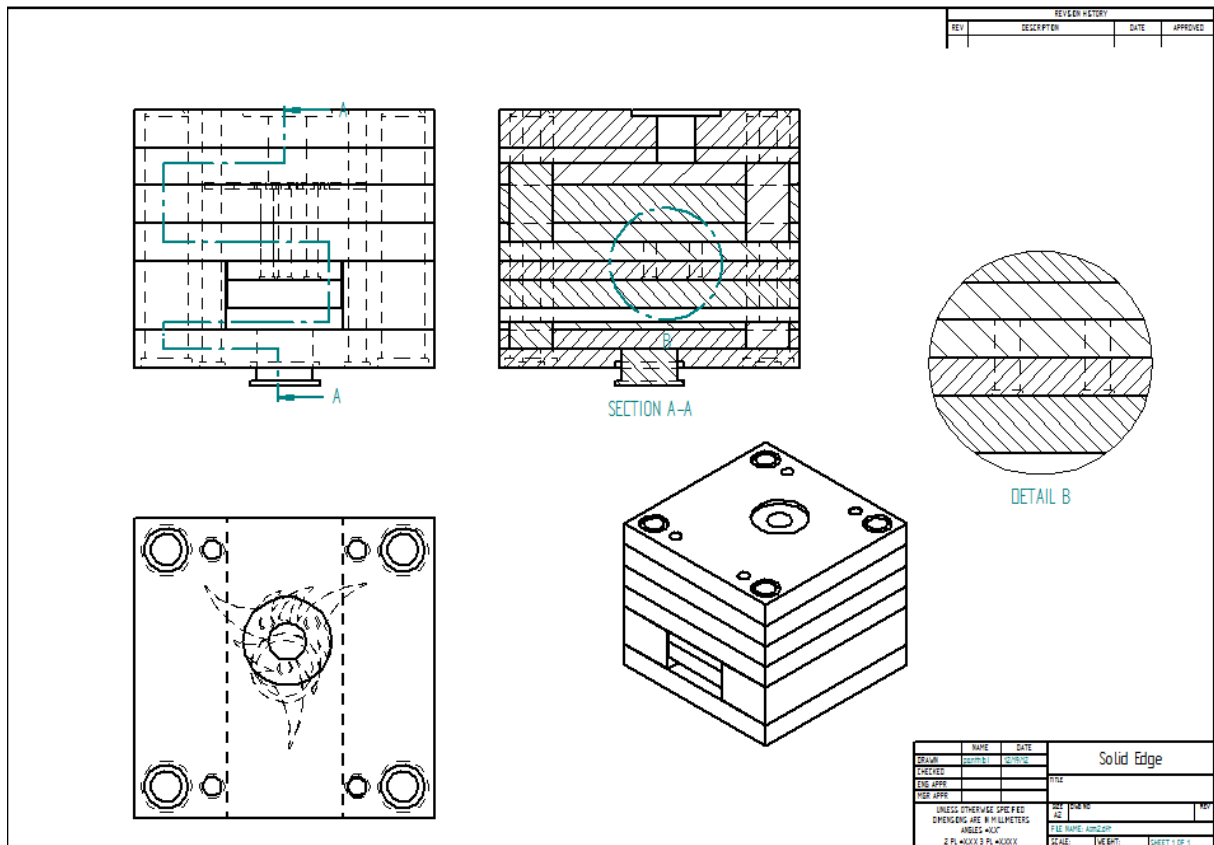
Section view of Mould [Drawn by Author in Solid Edge]
